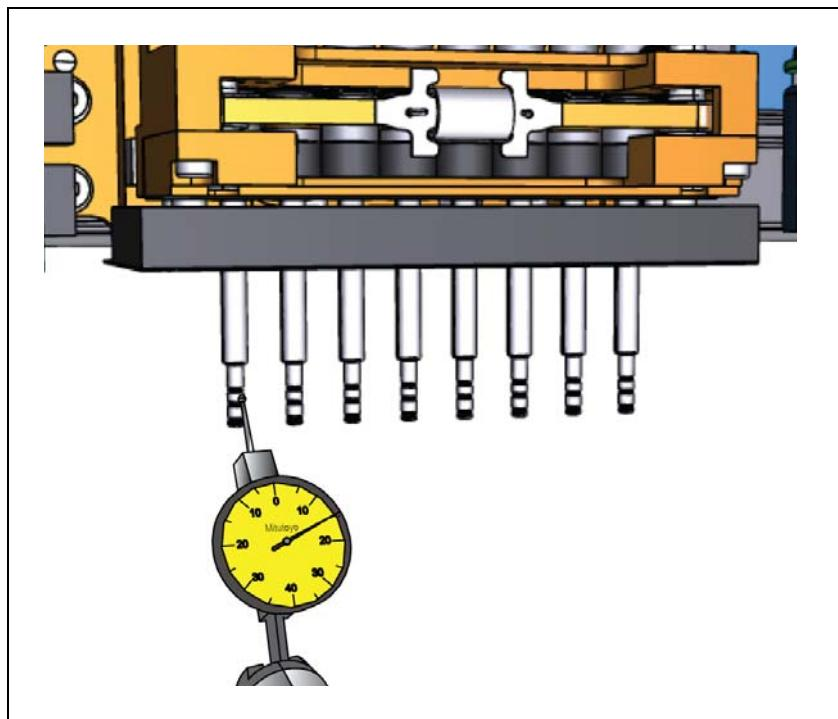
Position the dial indicator at HYDRA tool 1.
